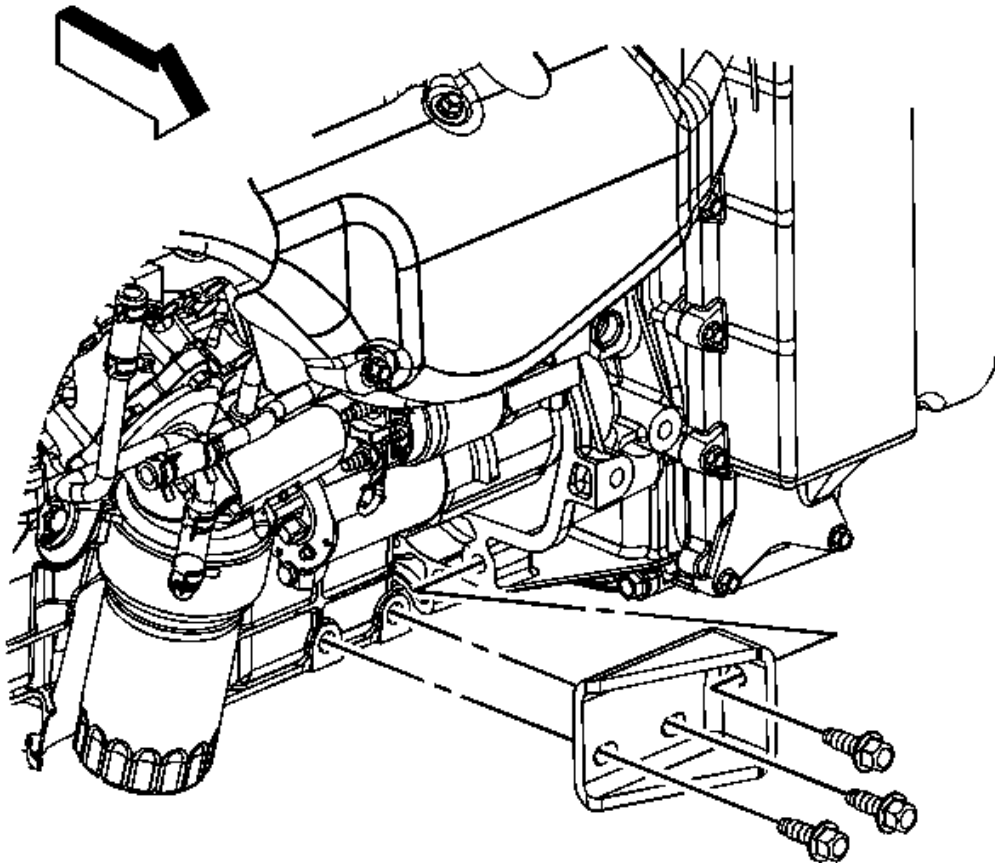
View Of Front Transaxle Brace & Engine Bolts
